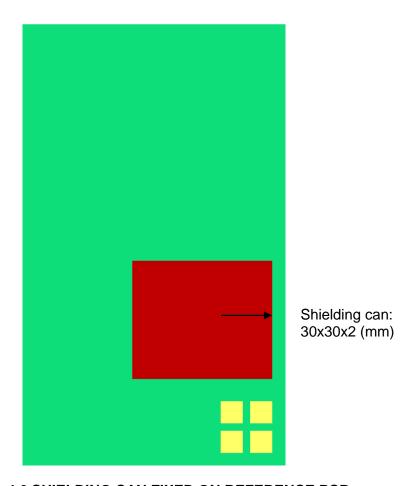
SHIELDING CAN FIXED ON REFERENCE PCB
